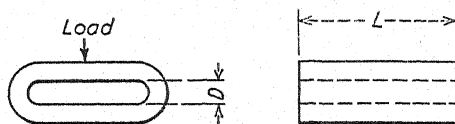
Deformed Specimen of Vacuum Brake Hose (see Table III).
